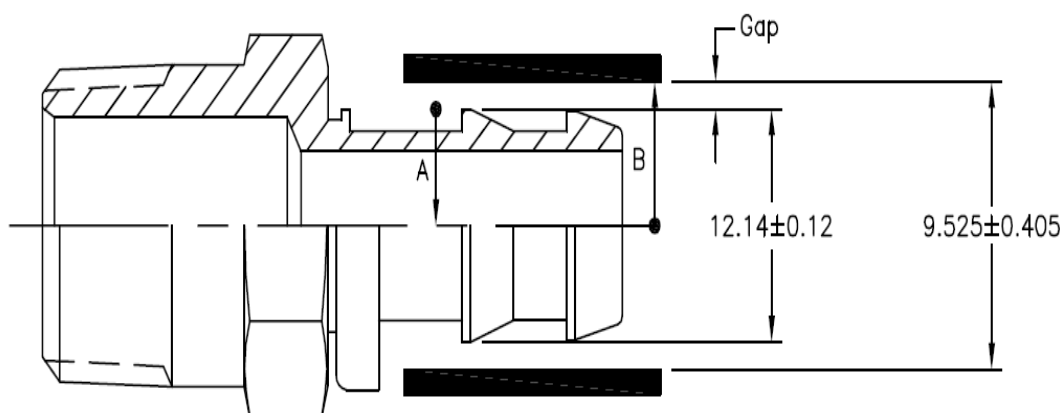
Tolerance stack-up Hose ID & Nipple OD
